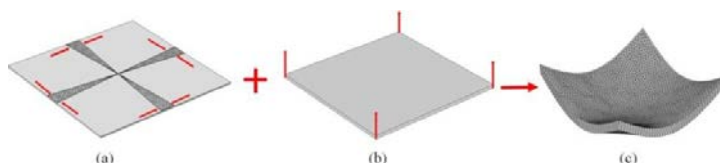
(a) In-plane shrinkage; (b) Out-of-plane bending; (c) 3D formed shape
